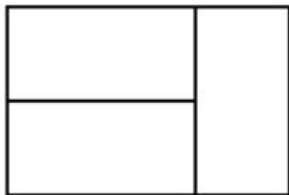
SHOWS HOW PETER GROUPED THE THREE PIECES TO BE WELDED TOGETHER. A PIECE OF WIRE CAN BE USED TO HOLD THEM IN PLACE.
